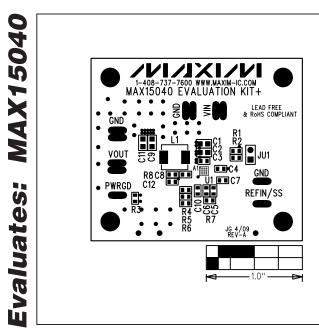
MAX15040 EV Kit Component Placement Guide— Component Side
